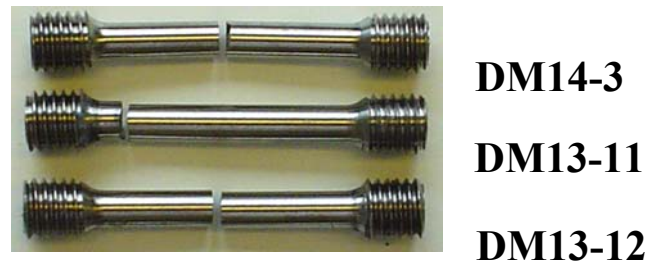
Fracture position of the friction welded tensile specimens.
